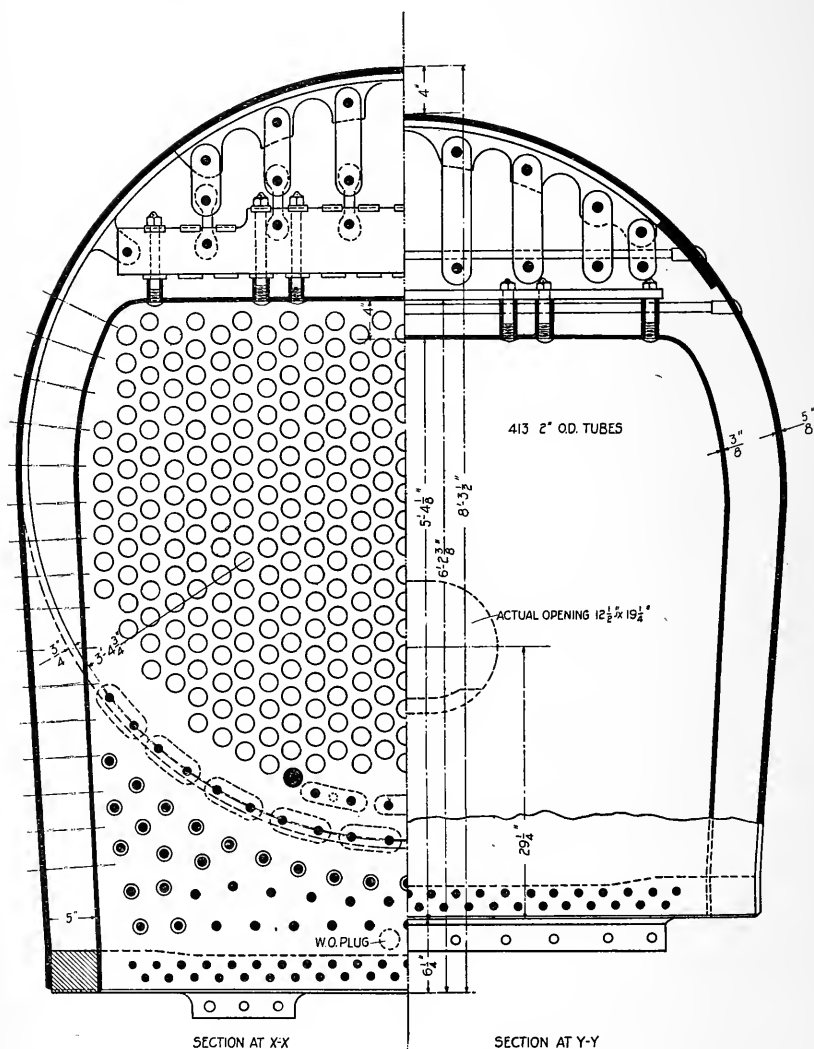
CROSS SECTIONS THROUGH THE FIREBOX
